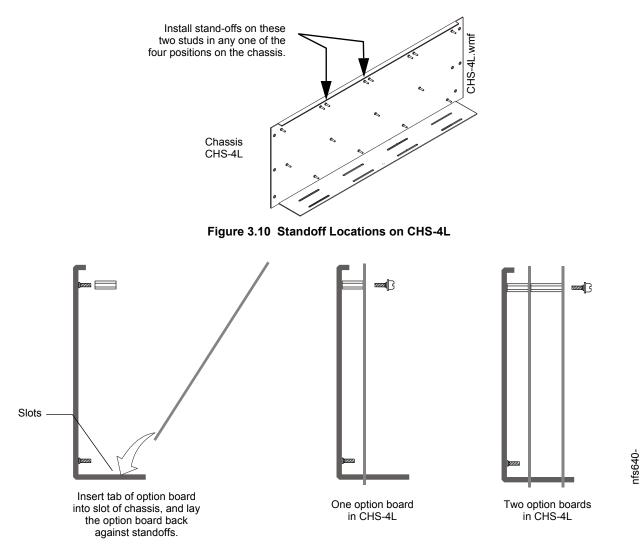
Mounting an Option Board in a Chassis (CHS-4L Shown)
